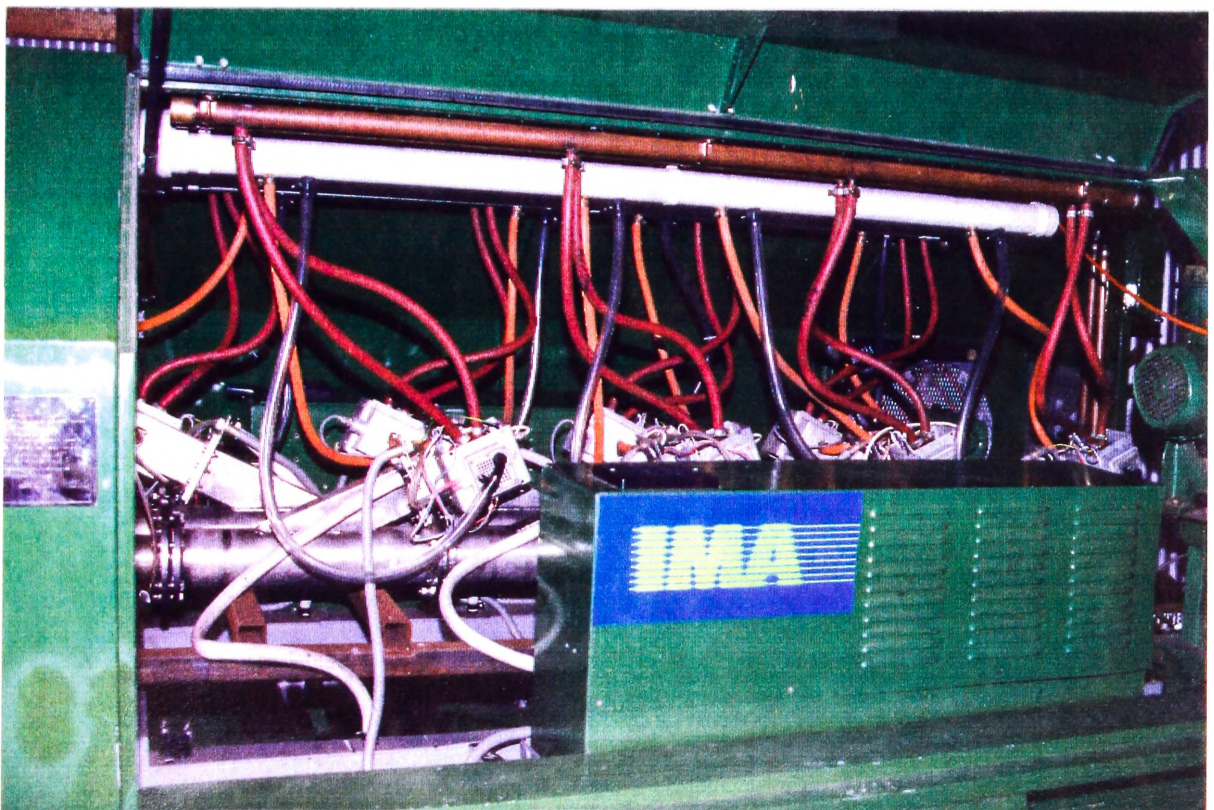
Eight pipe heater sections showing electrical wiring and plumbing.
